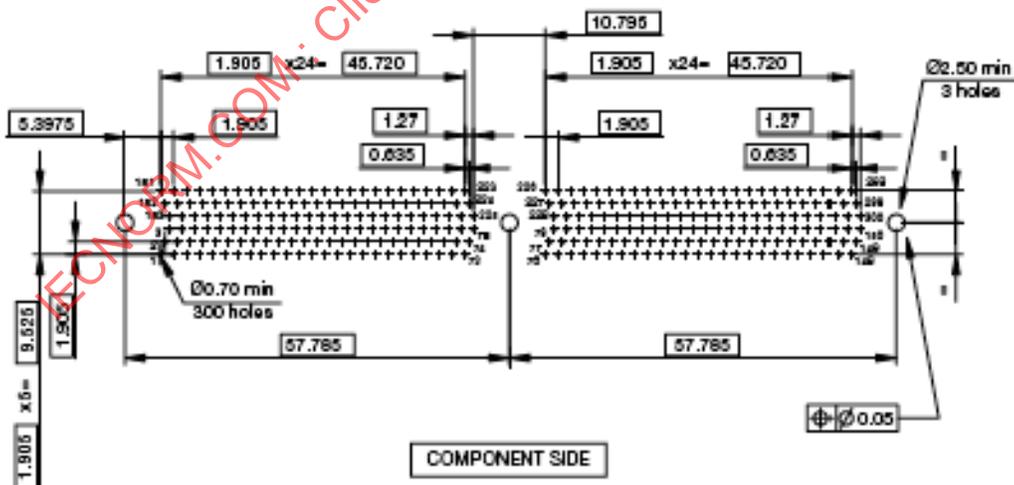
High-speed signal module receiver receptacle connector assembly PCB pin tail layout dimensional specifications
